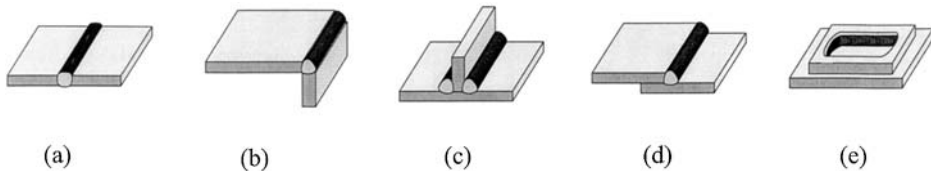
(a) Butt; (b) corner; (c) T; (d) lap; (e) slot weld joints.
